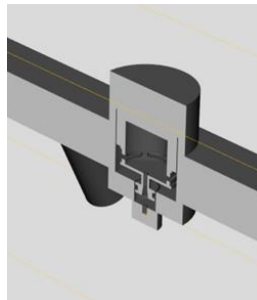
21 Cross section of side feed injector(B) assembly inside fuel common rail
